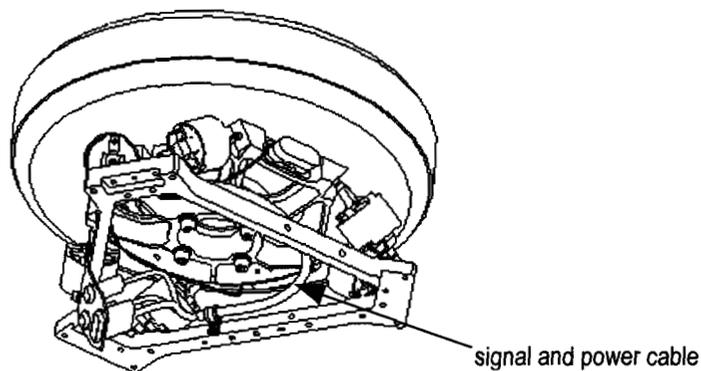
Line drawing of Teldix RDR-68 reaction wheel mounted on RWIA
